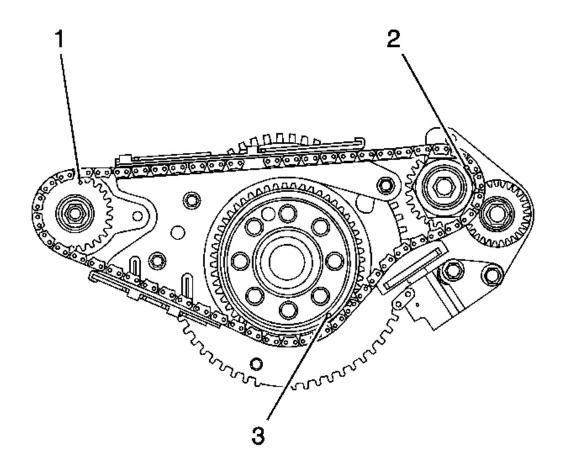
View Of Sprocket Timing Marks Courtesy of GENERAL MOTORS CORP.
